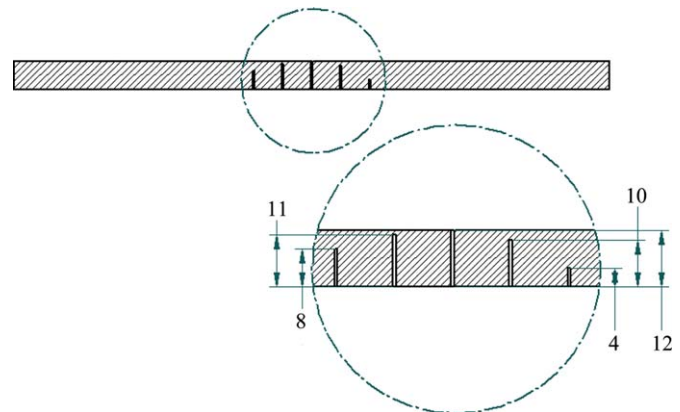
Sectioned and detailed view of the thermocouple locations within the porous plate. All dimensions in mm.
